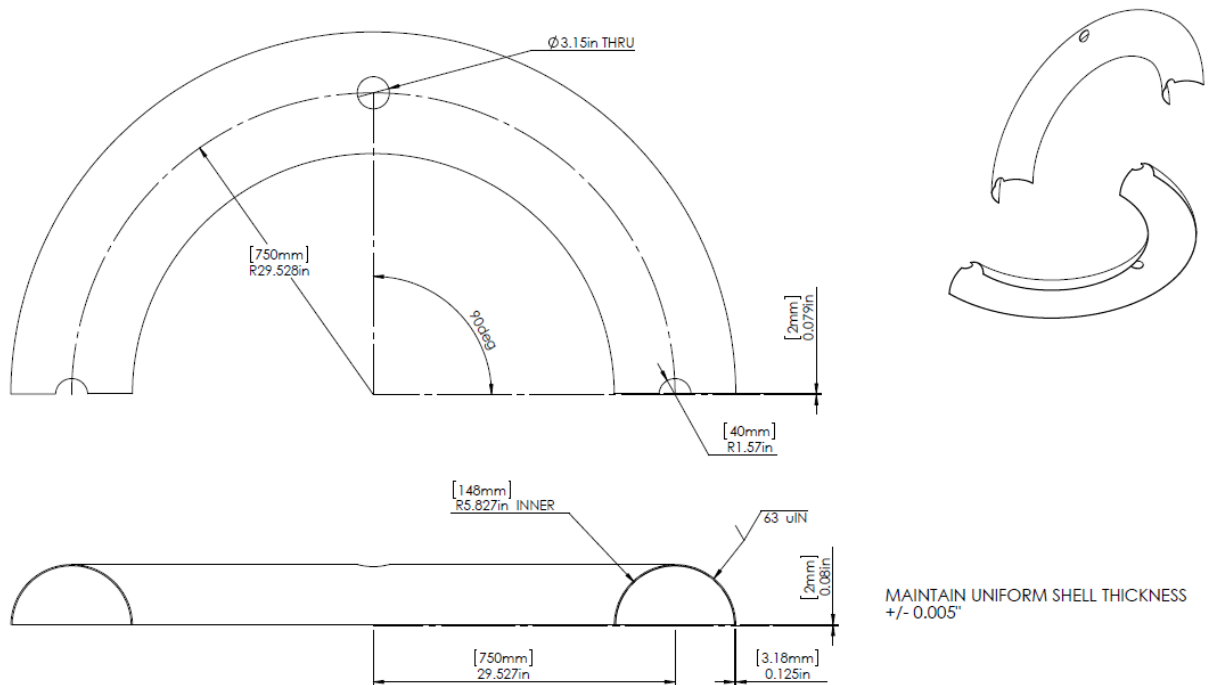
Aluminum Ripple Reduction Toroidal Shell. A segmented aluminum shell is used to reduce the magnetic ripple caused by the discrete TF coil turns. The shell is segmented into 4 pieces to reduce circulating currents. All edges must be insulated with Kapton tape.
